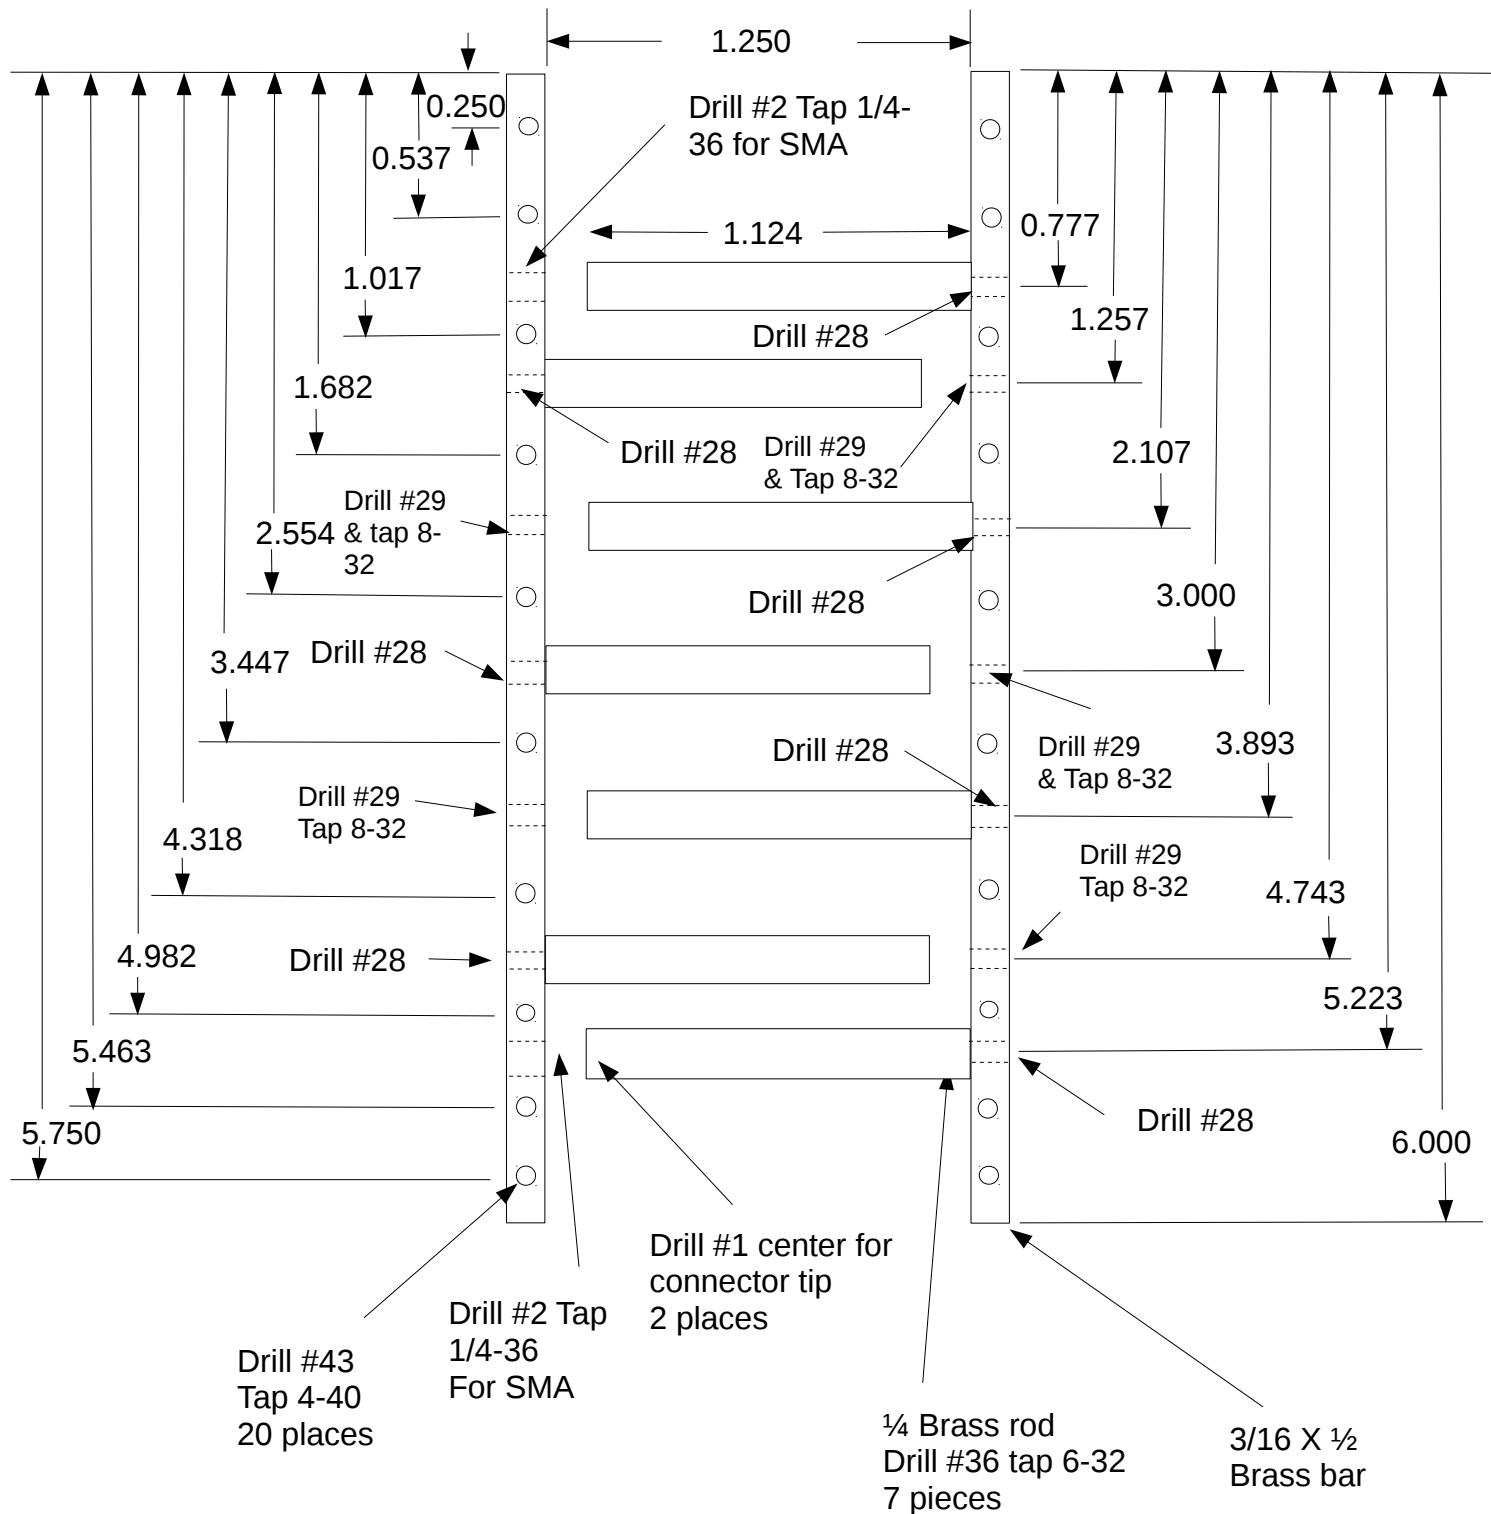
Mechanical drawing for 2310 MHz test filter. While not specified in the drawing, the edge and side bar holes are located along the bar edge and side center line.
